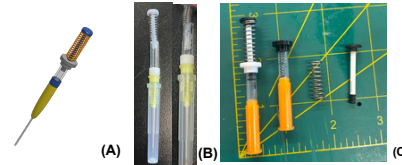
(A) Compact view of syringe, (B) Custom-Built Syringe Assembly, (C) Cam Mechanism Testbed
